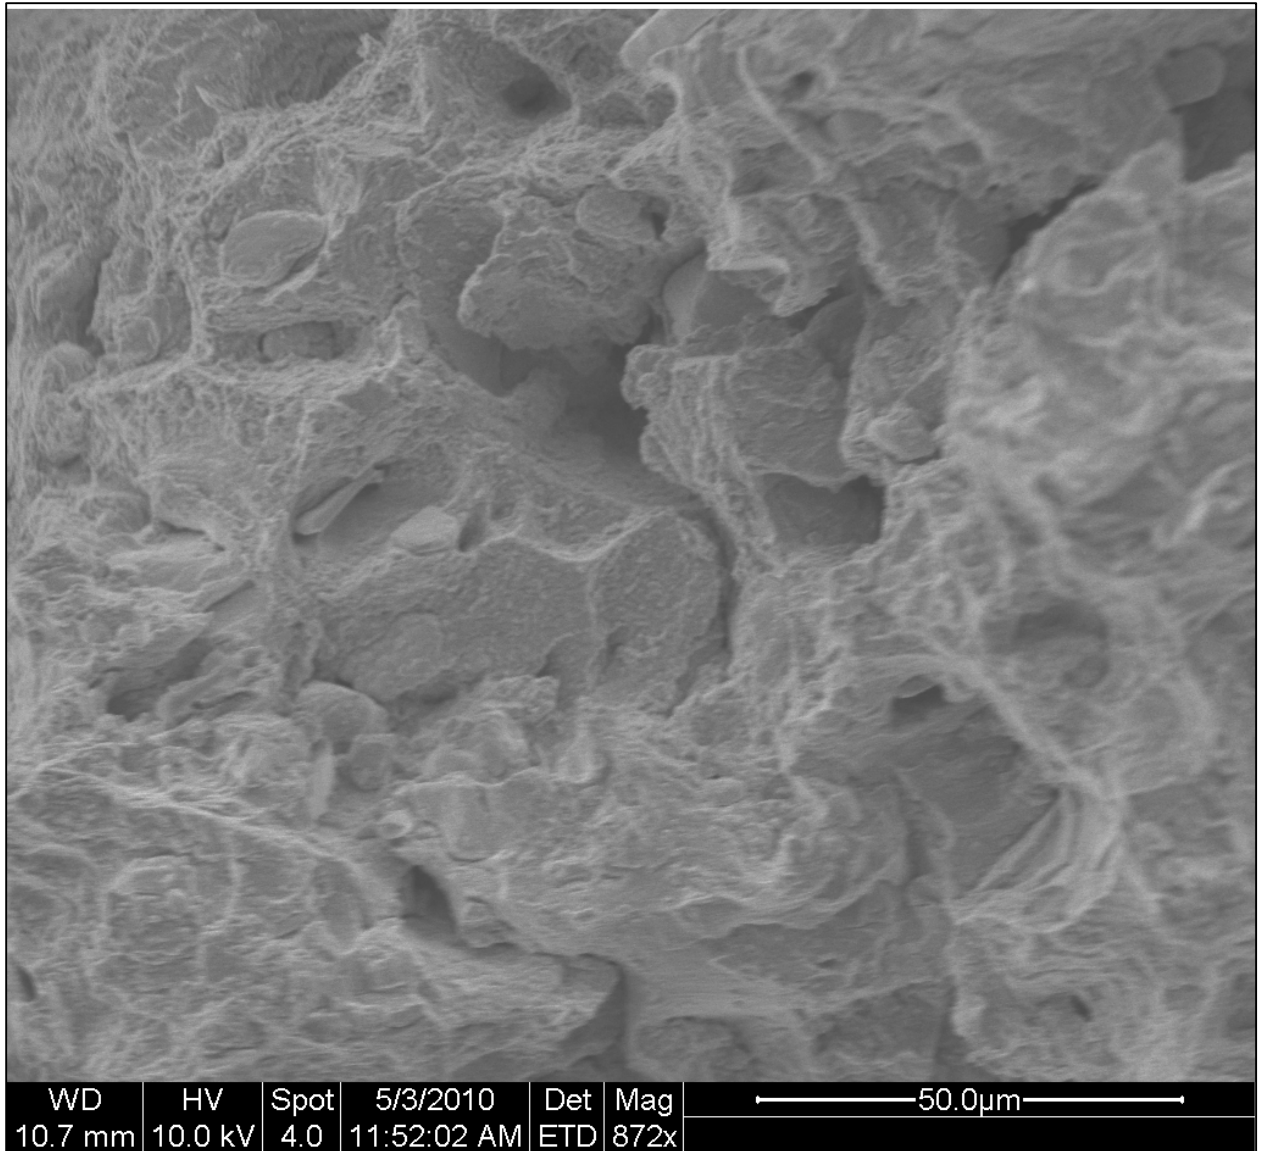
Haynes 230 on-cooling 2046 fracture surface. The surface appears jagged and deformed throughout the image.
